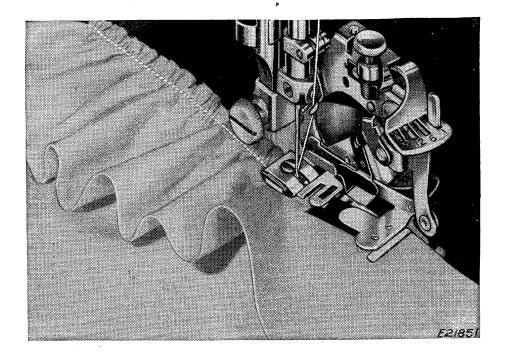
Making a Ruffle and Attaching It in One Operation Place material to which ruffle is to be attached under separator blade and under separator guide (Line 1, Fig. 128). Proceed the same as for plain gathering.
